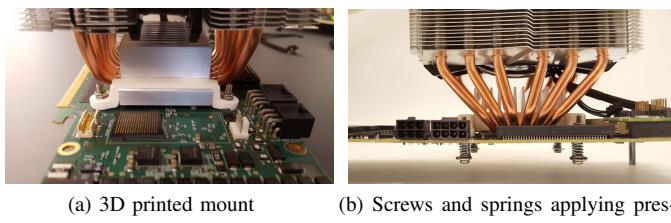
Custom mounting for air cooled heat sink on Stratix 10 development board
